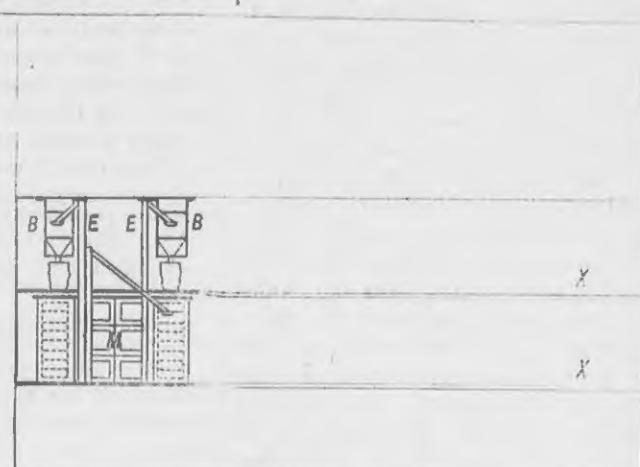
NEW SYSTEM OF GRANULATING WITH PATENT SELF-CONTAINED MACHINE.
